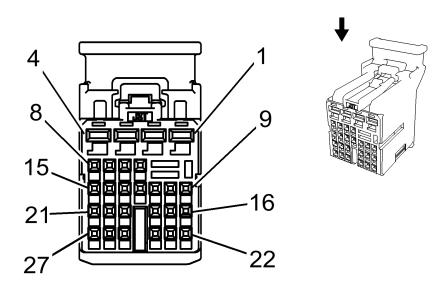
K9 Body Control Module X6 Connector End Views Courtesy of GENERAL MOTORS CORP.
